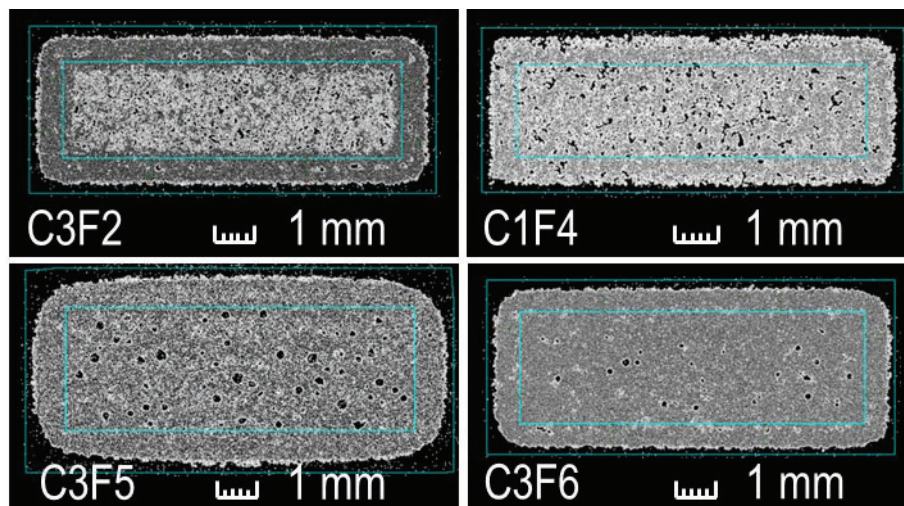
XCT-scan pictures of tensile specimen cross sections of the 2nd sample row
